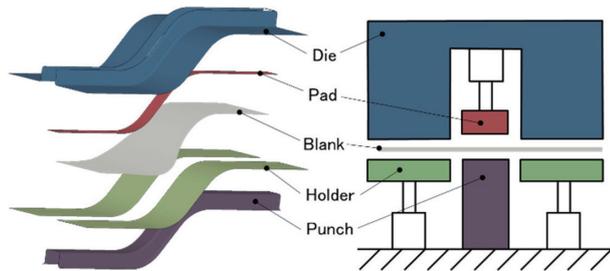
Die construction in In-plane-shear draw-bending⁴⁾
